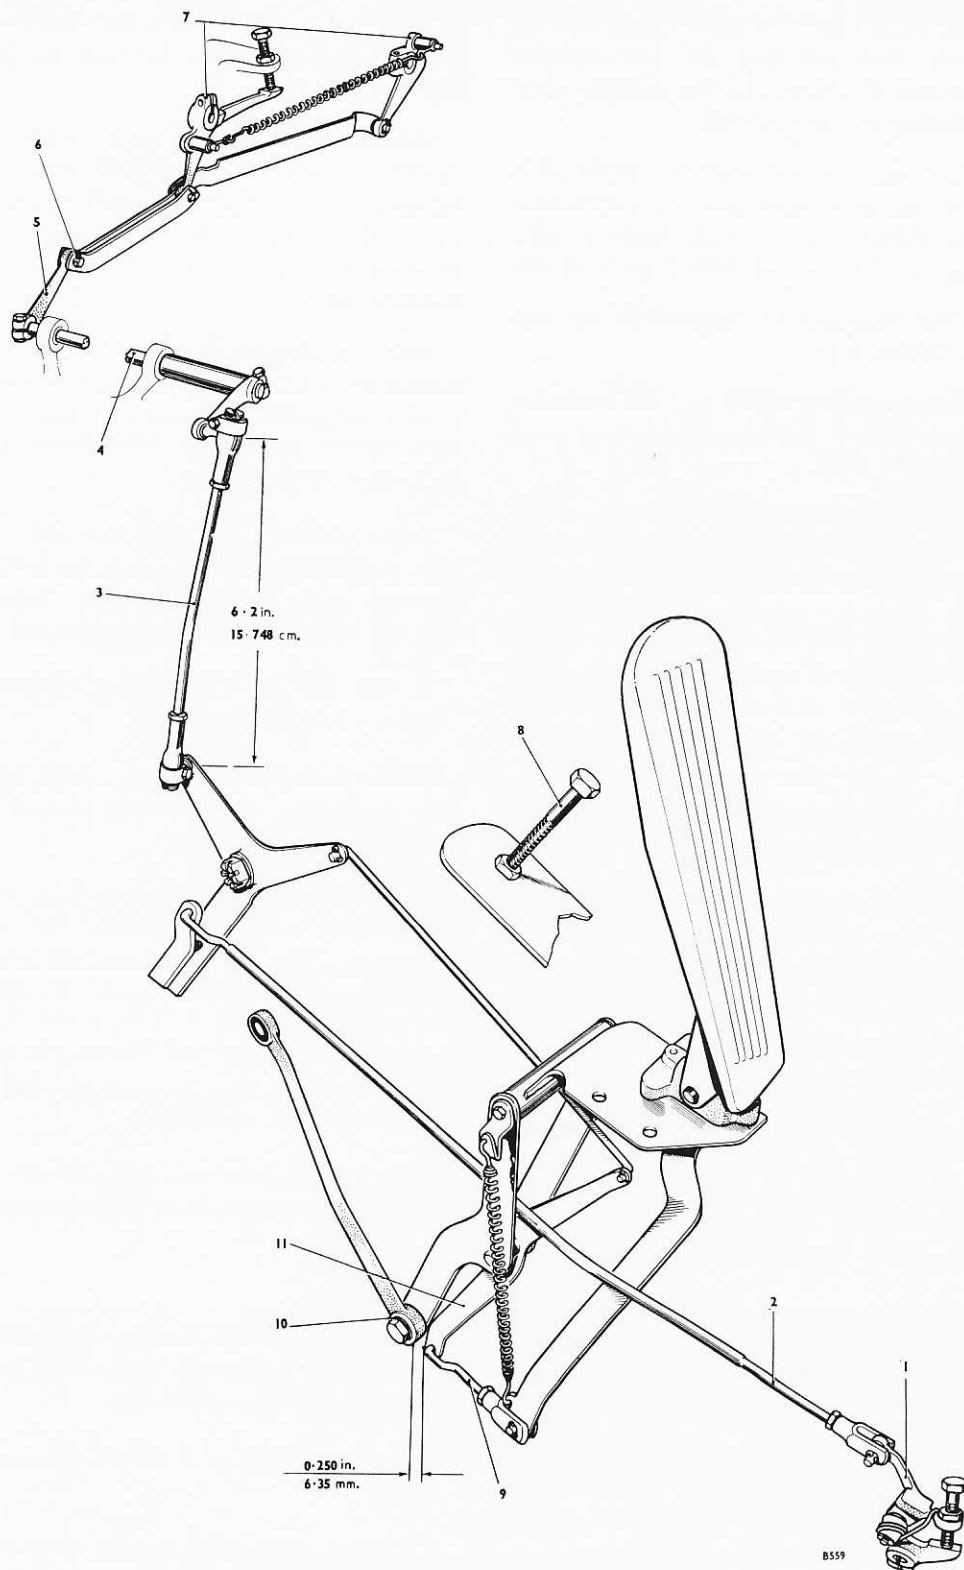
Throttle linkage left-hand drive — late S2 cars
